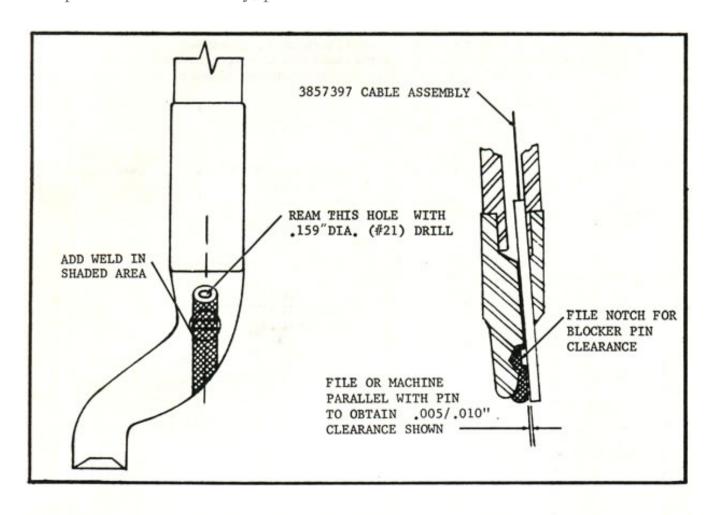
MODIFICATION OF SHIFT LEVER LOWER END
